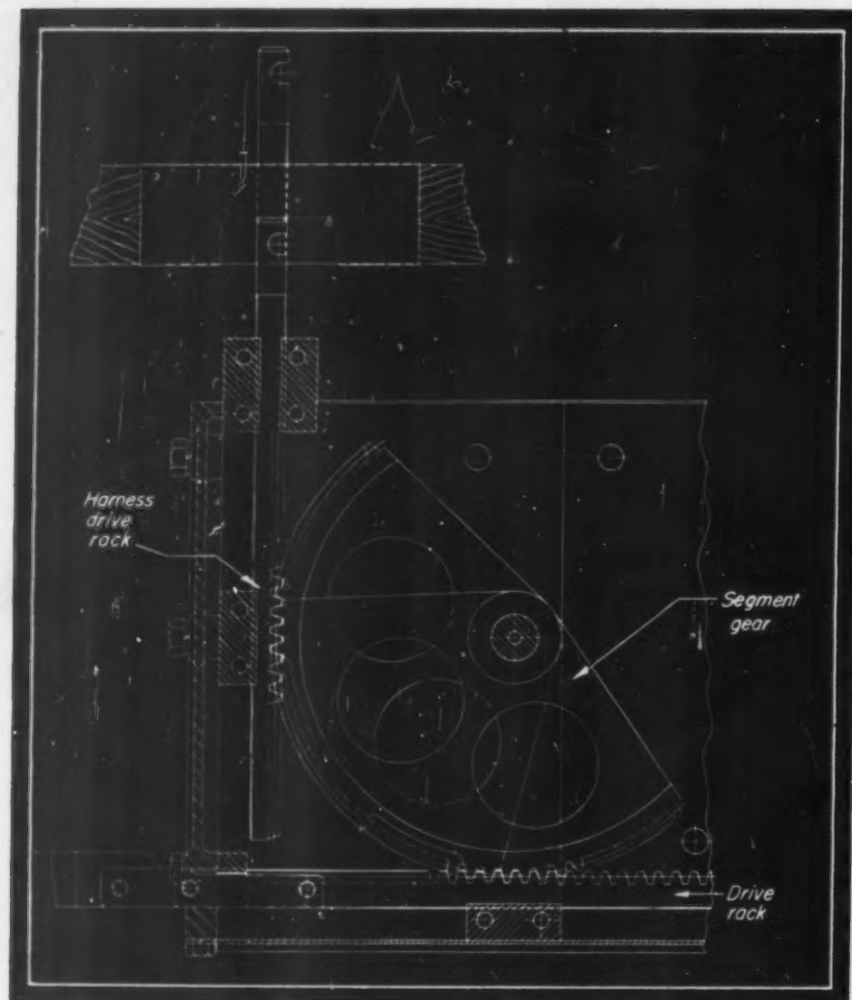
Expensive segment gear and drive racks for operating each harness on the laboratory machine
